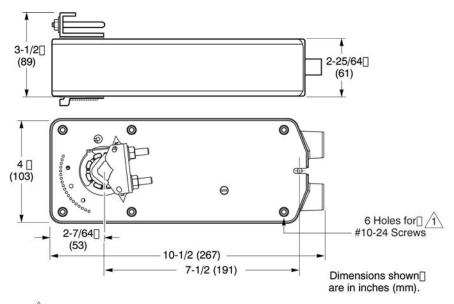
MS40-7043 Spring Return Damper Actuator Dimensions.
